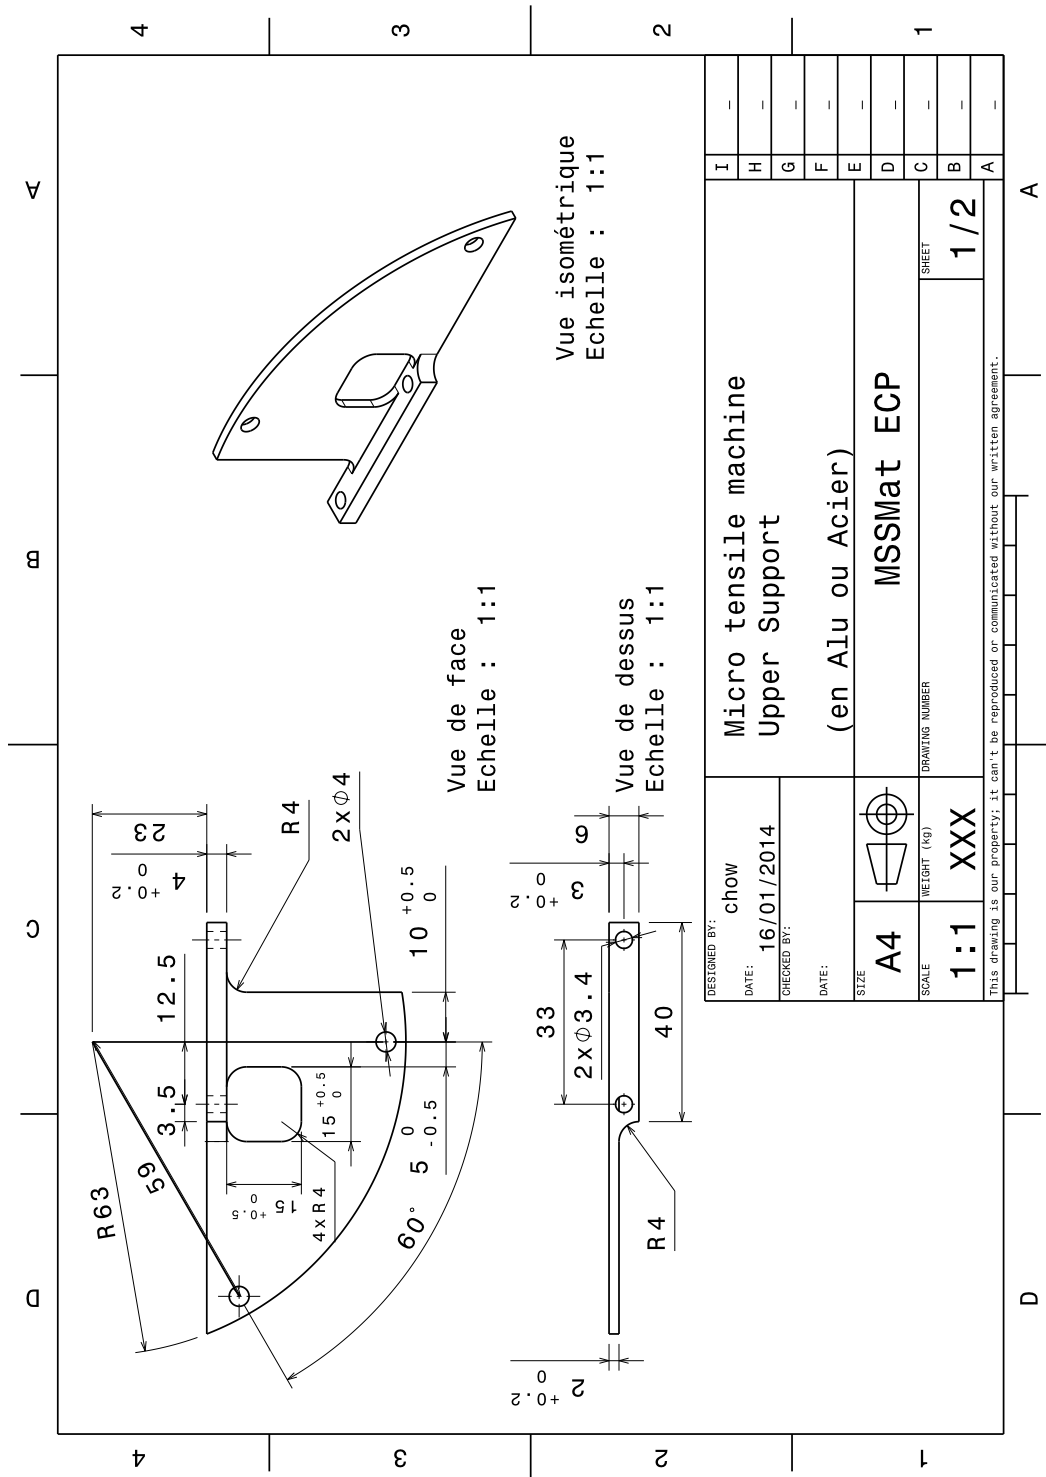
Mounting system of the micromachine on the wafer holder in goniometer - upper support.
